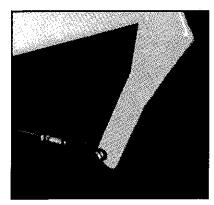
CABLE CONNECTION TO SAFETY BAR
